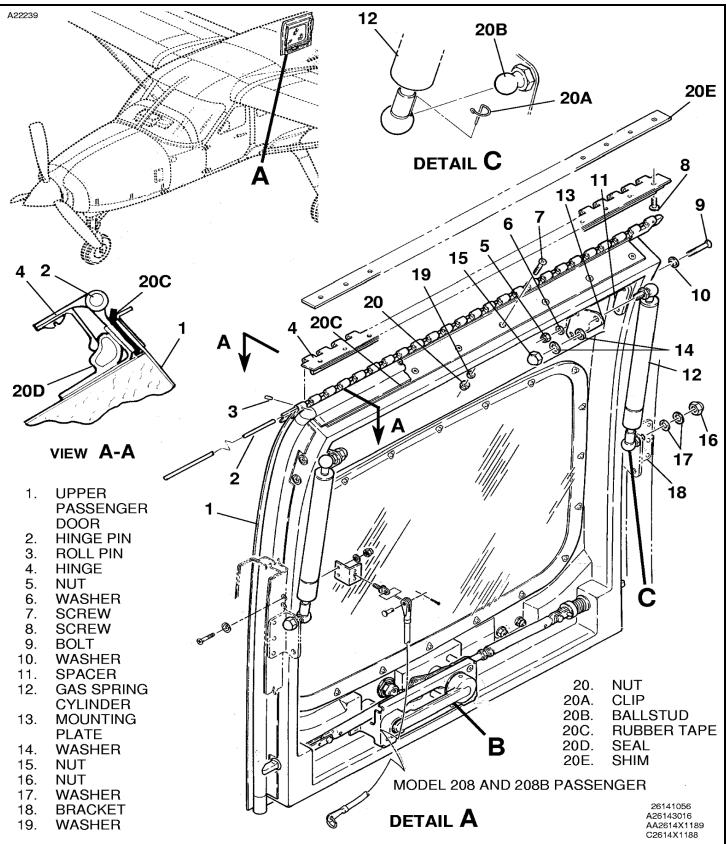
Sheet 1 : Upper Passenger Door Installation
